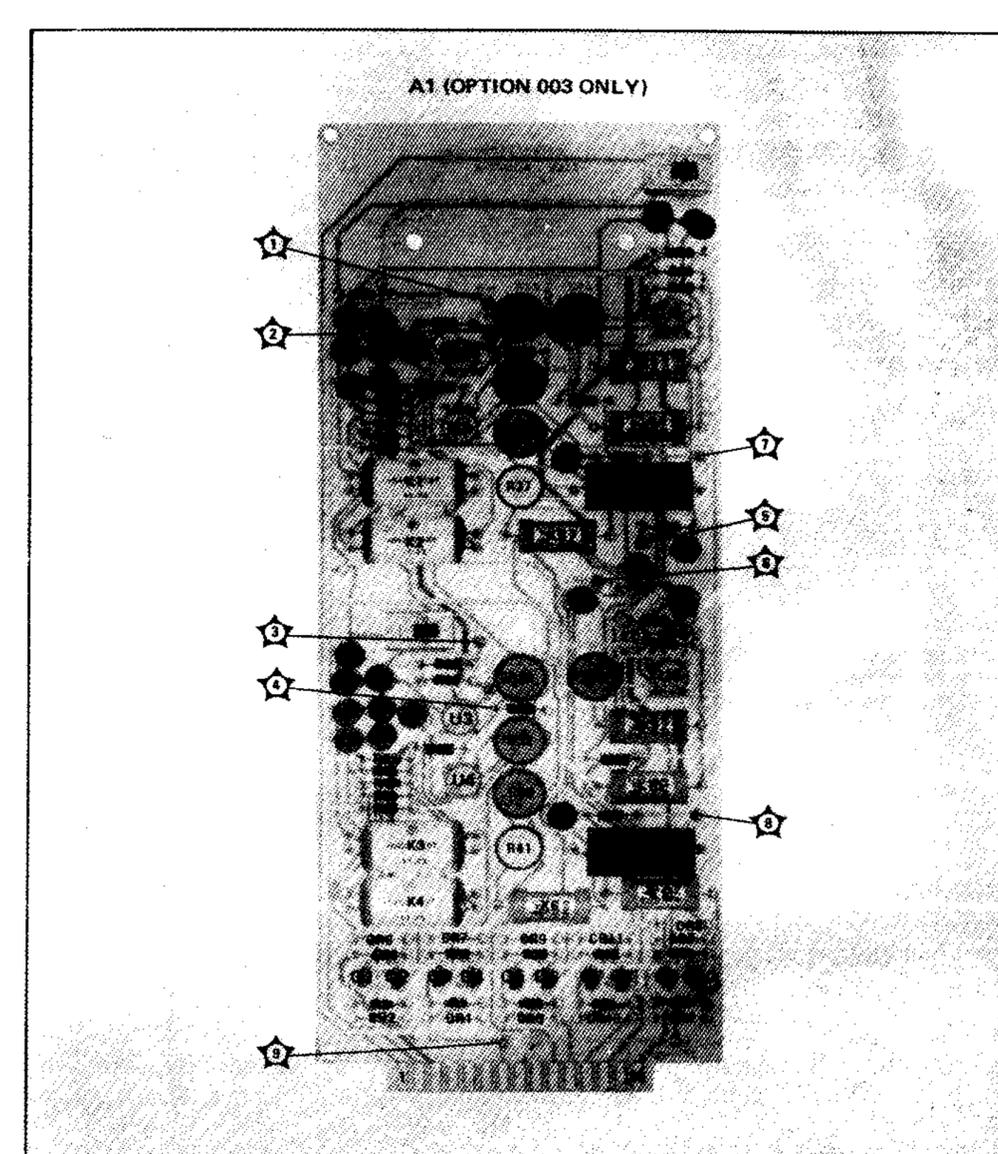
A1 Predriver Assembly of 8445B (Option 003)
